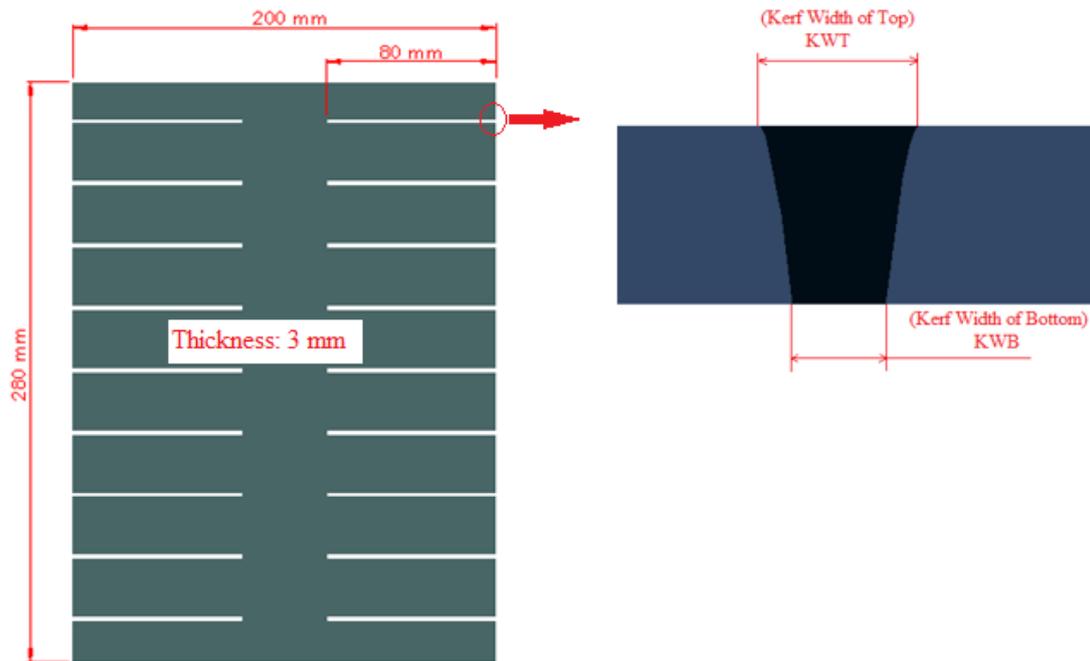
Workpiece dimensions, kerf width of top and kerf width of bottom
